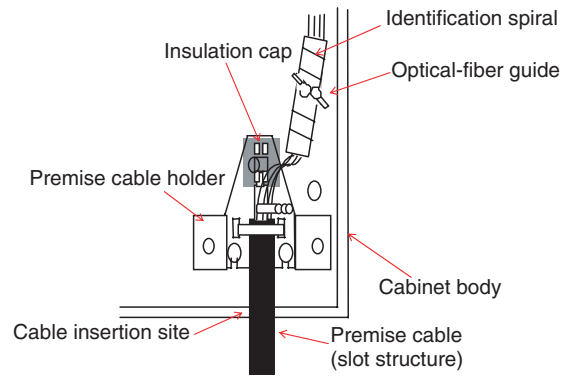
Premise optical cable holder used in PT and PD cabinets.
